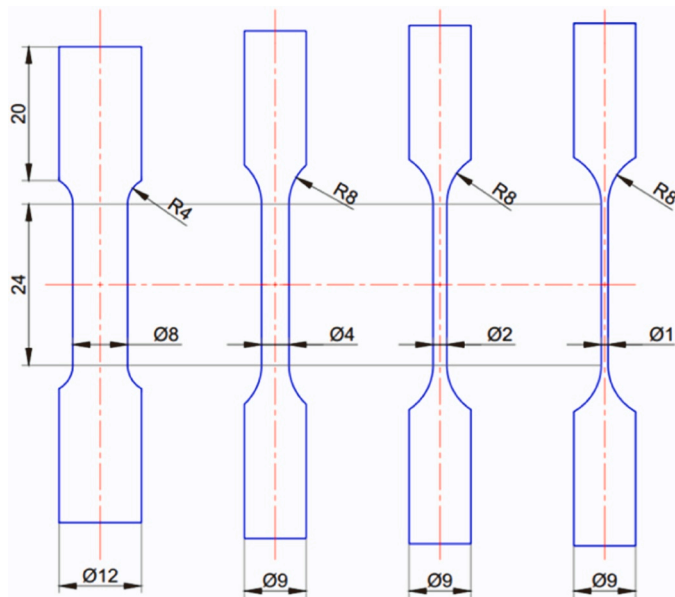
Cylindrical specimens (CS) geometry and dimensions [mm].
